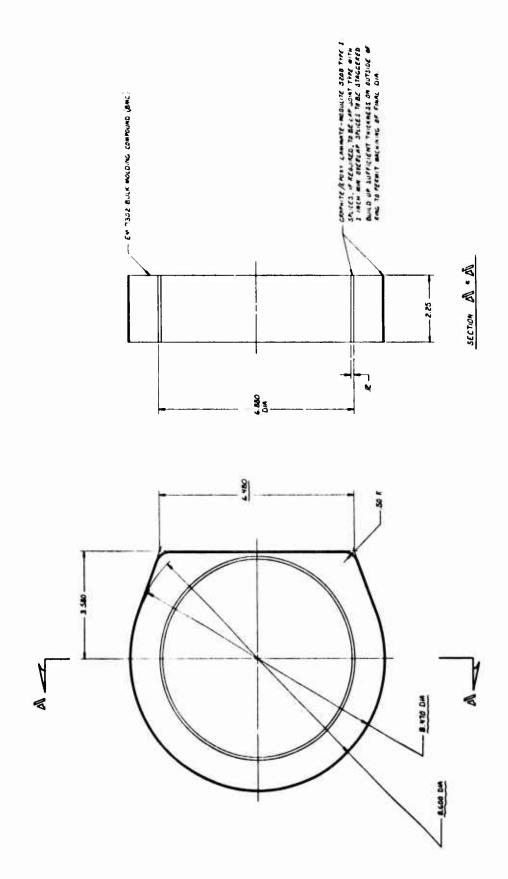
Bearing Ring, Main (WRD Drawing No. 4693).
